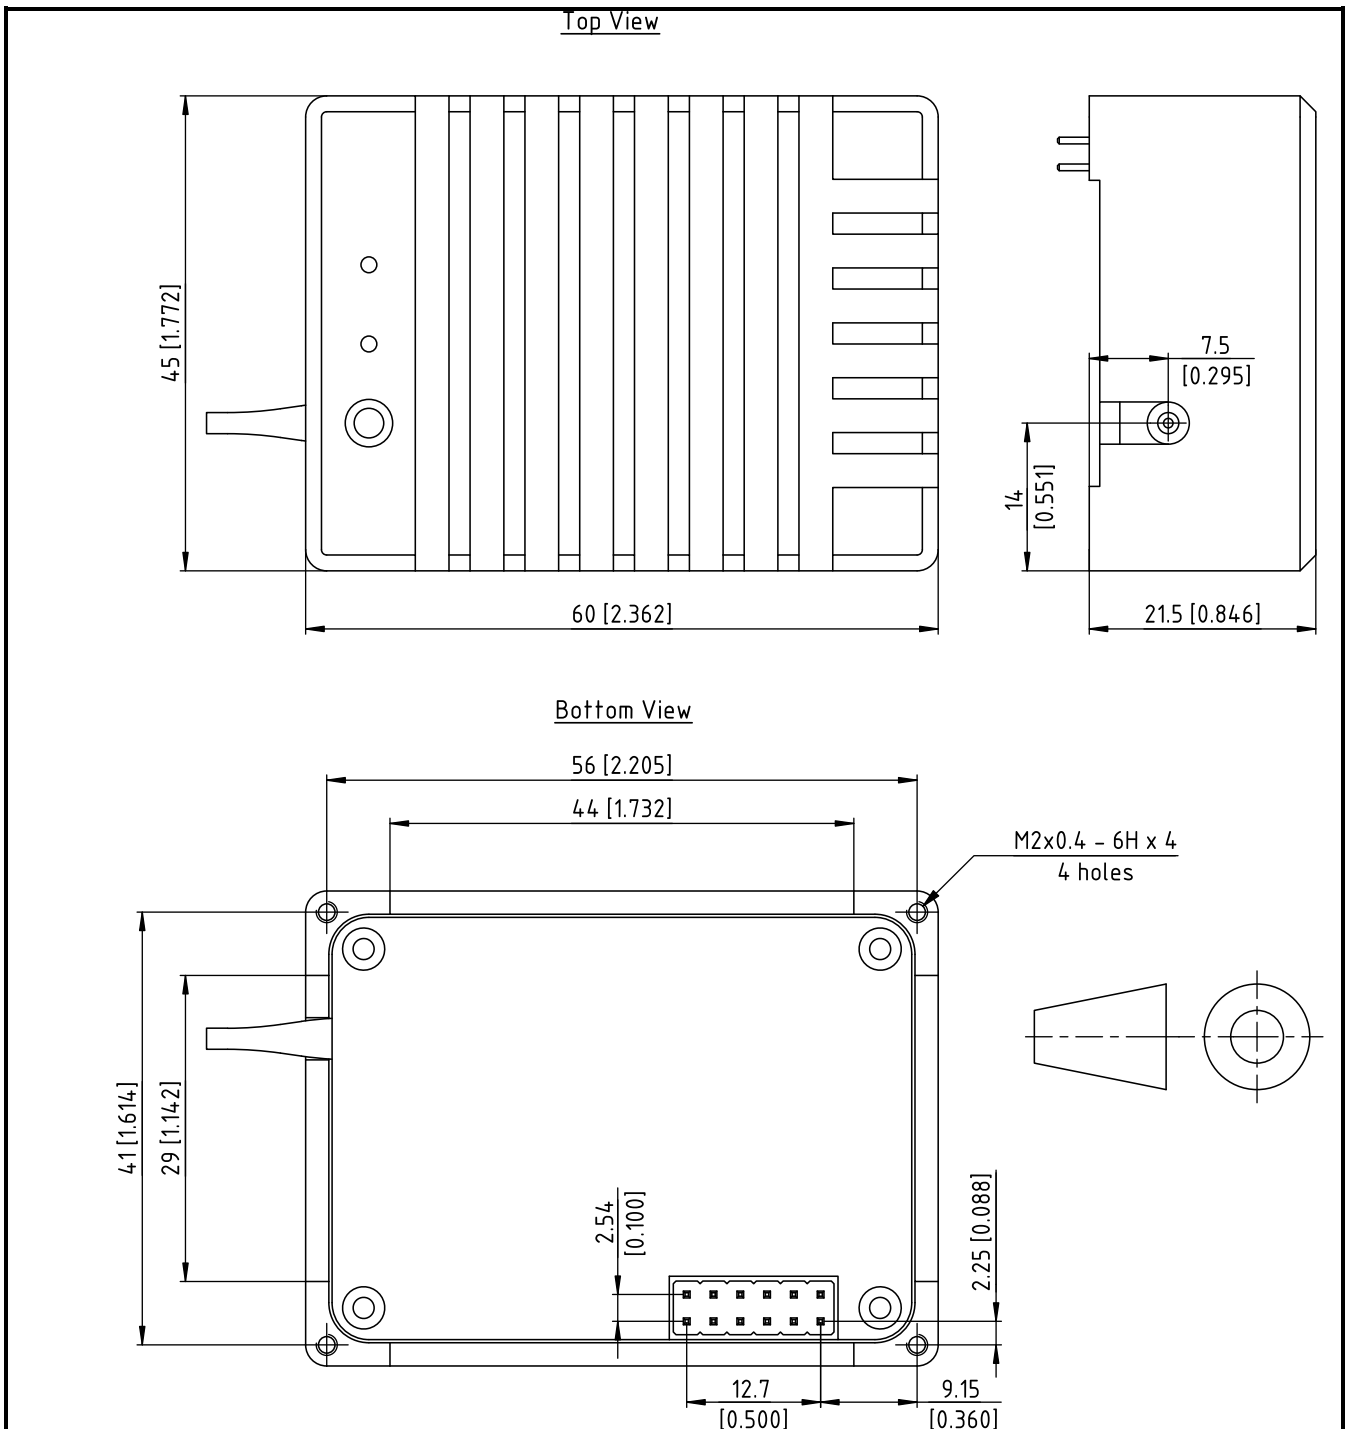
Drawings of Light Source. Dimensions are in millimeters [inches]
